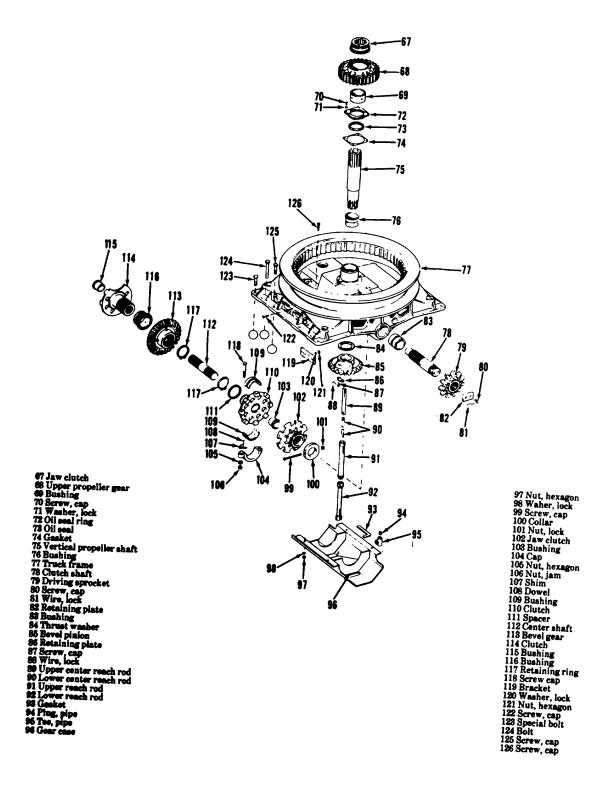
Vertical propel shaft, exploded view (sheet 2 of 3).
